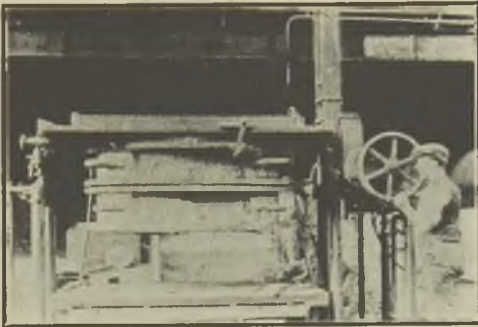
MAKING AXLE BOXES. THE MOULD COMPLETELY INVERTED.
